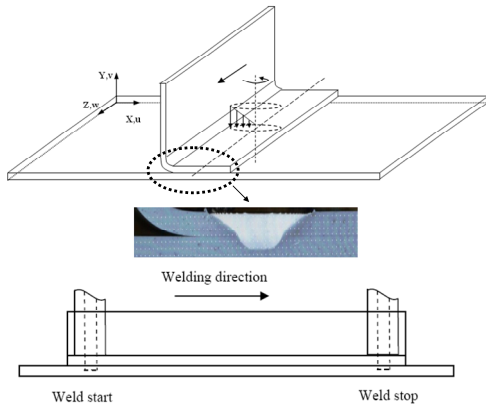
Geometry of a stringer friction stir welded to a plate. Used for coupling of residual stress and in-service load analyses, from Tutum et al. [46]
